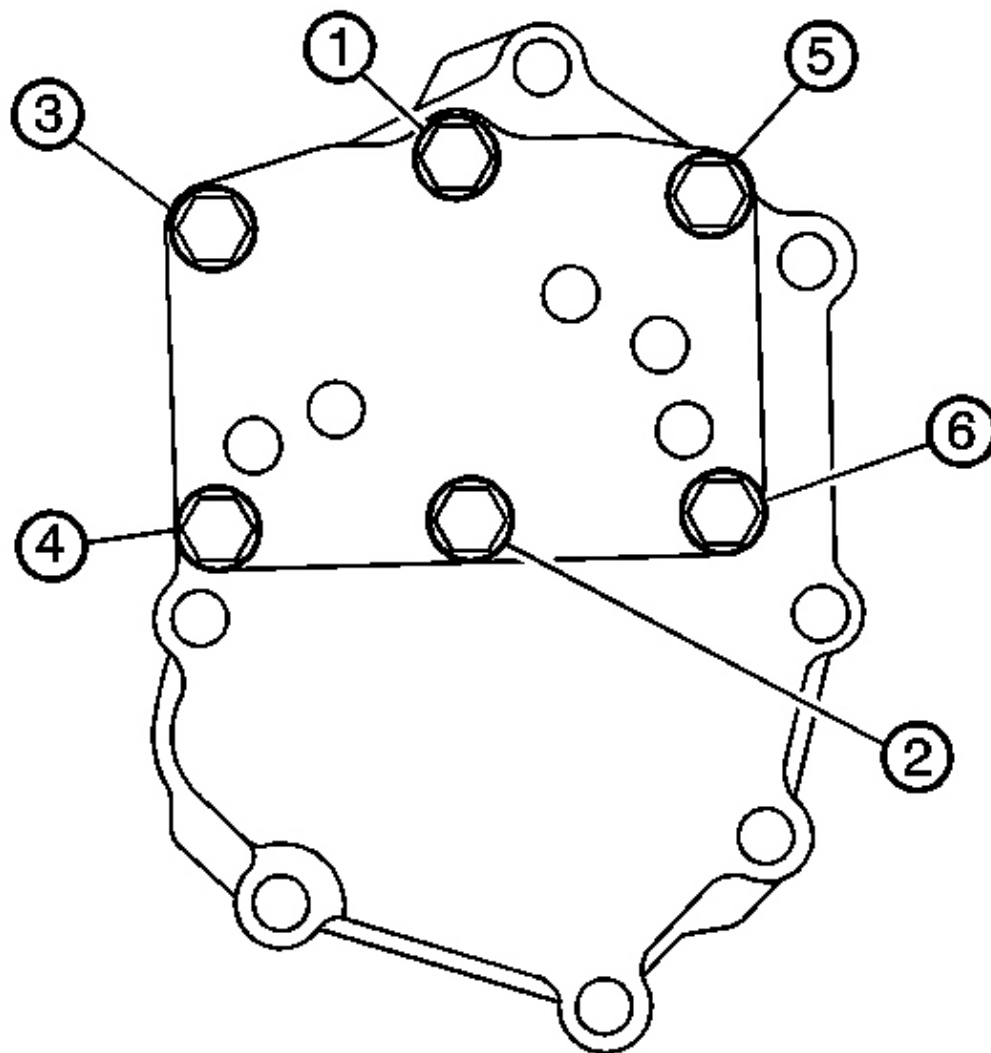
Tightening The Clutch Pressure Control Solenoid Bolts In Sequence
